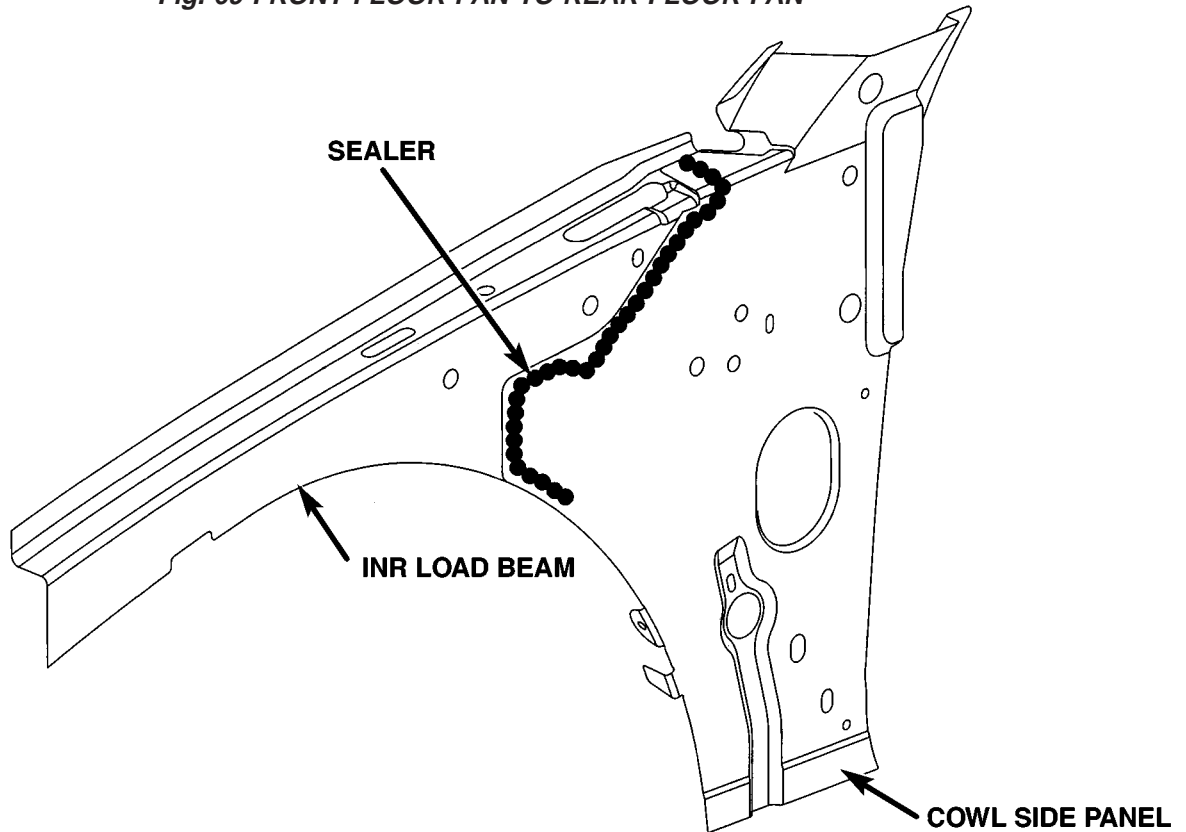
INNER UPPER LOAD BEAM & COWL SIDE PANEL
